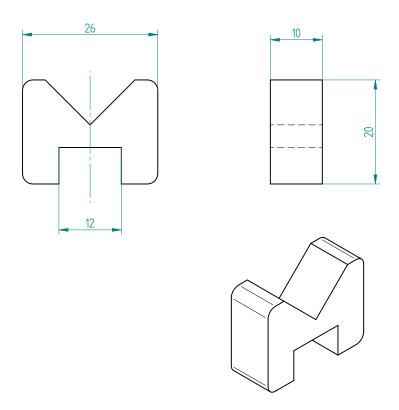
$\mathbf{v}$  drawing for alignator
